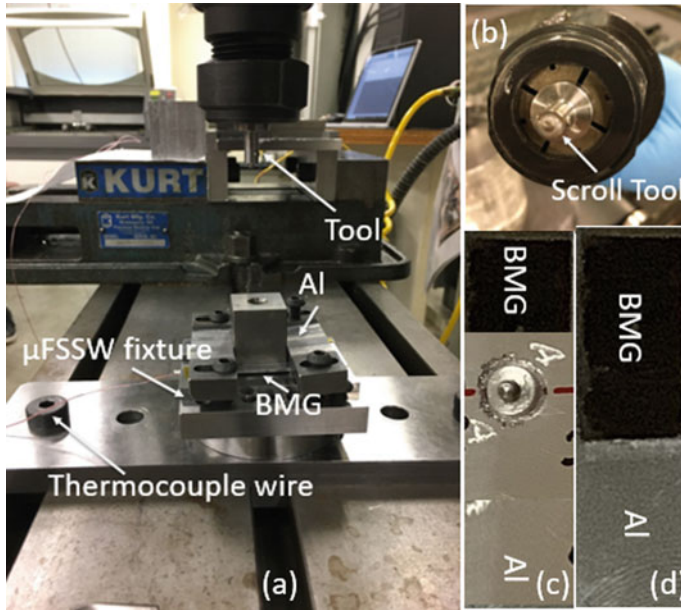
Photographs of a μ FSSW experimental setup, b a scroll tool, c and d front and back view of BMGs-to-Al weldment joined via μ FSSW. (Color figure online)
